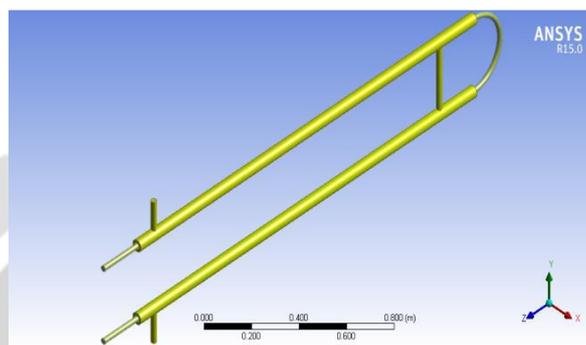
Geometry modeling of 2-Pass Double Pipe in ANSYS work bench
